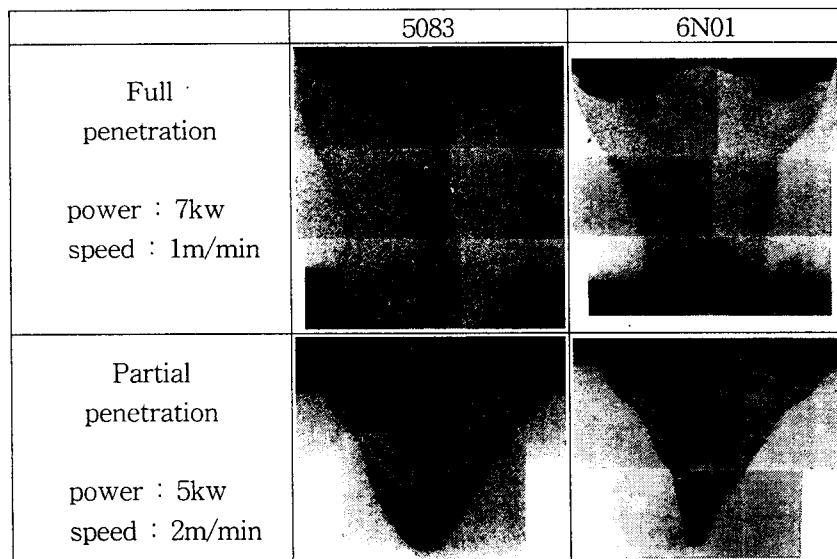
Macrostructures of bead of joints welded with laser power and weld speed.
